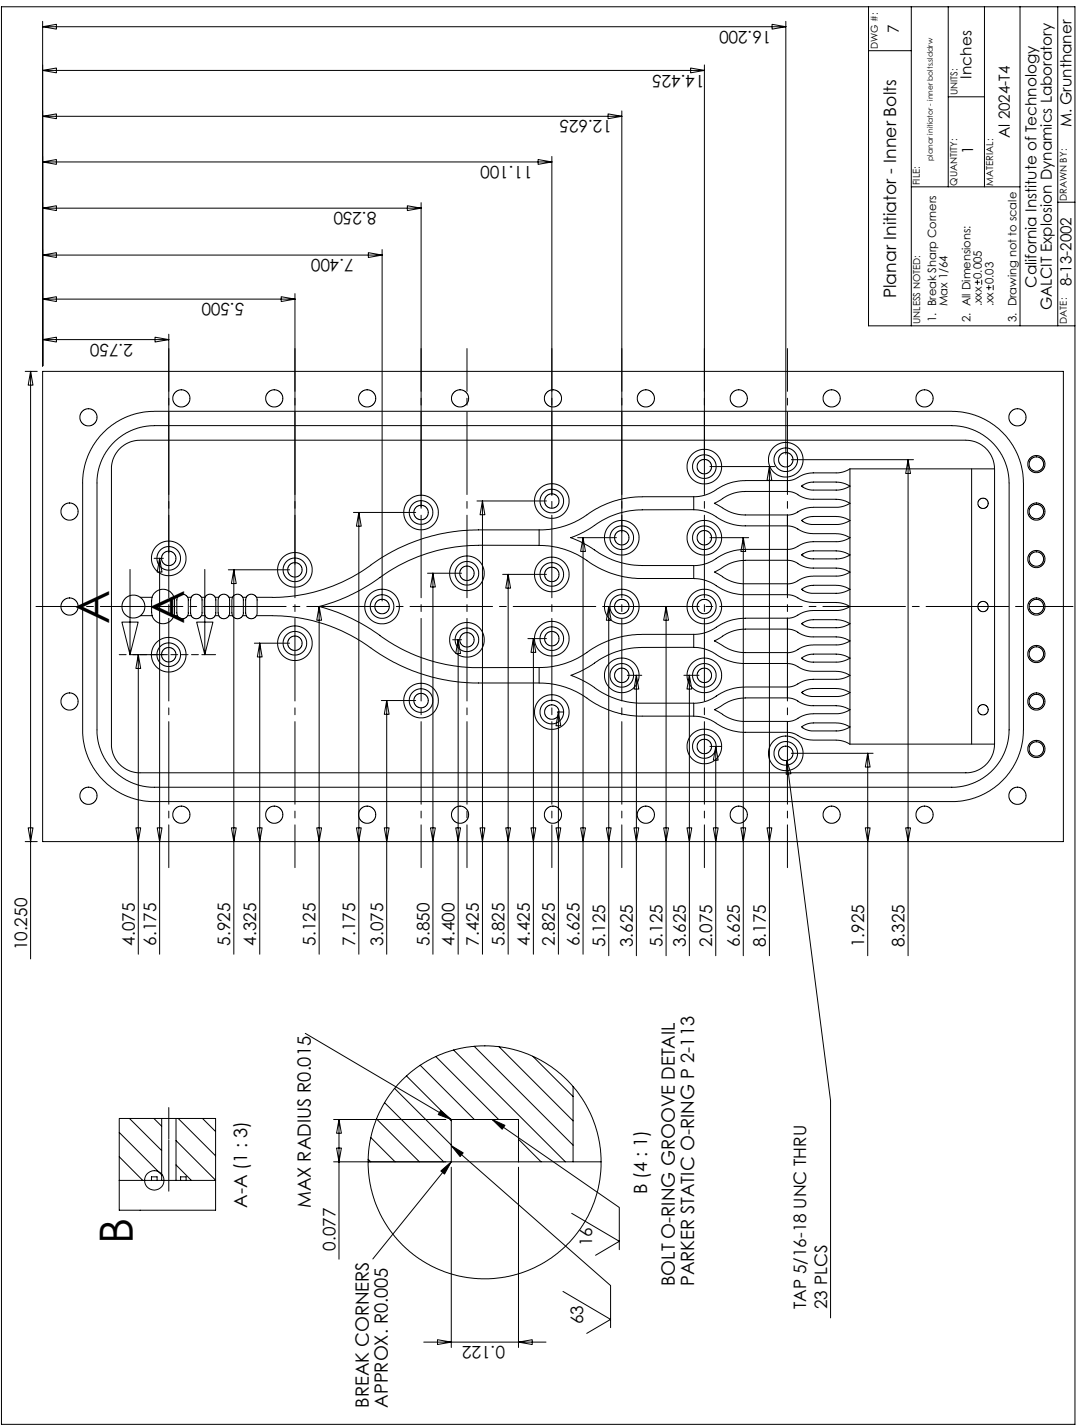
Planar Initiator - Inner Bolts, Dwg No. 7
